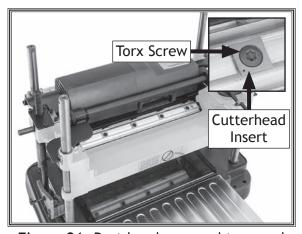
Dust hood removed to reveal cutterhead inserts and Torx screws.
